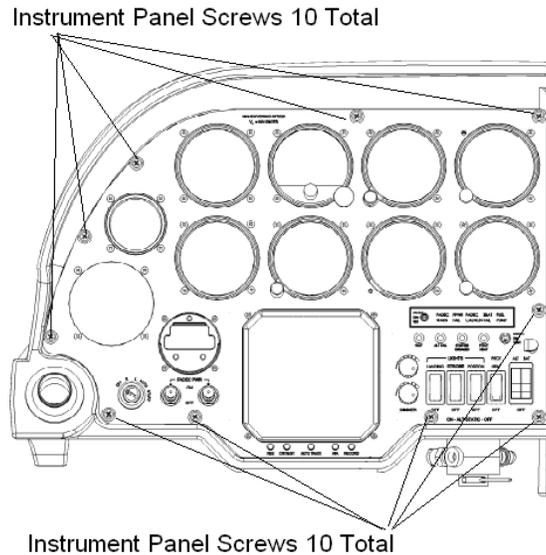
Instrument Panel Assembly Showing the Location of the Screws
